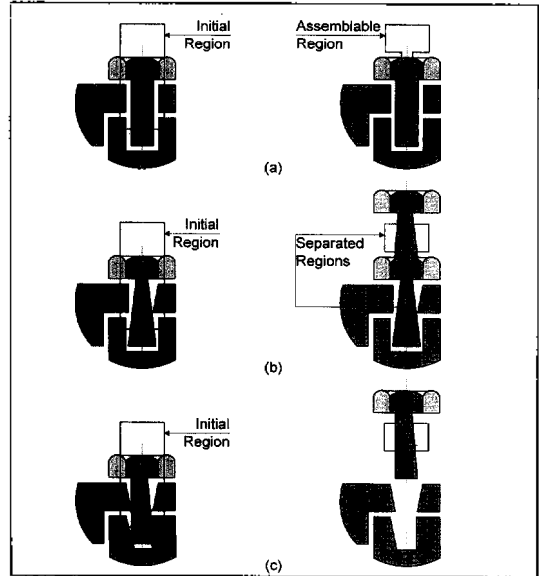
Assembly checking: If the parts of an assembly have variations, assembly is classified by three cases as shown in (a) assembly, (b) non-continuous assembling path and (c) no assembling position.
